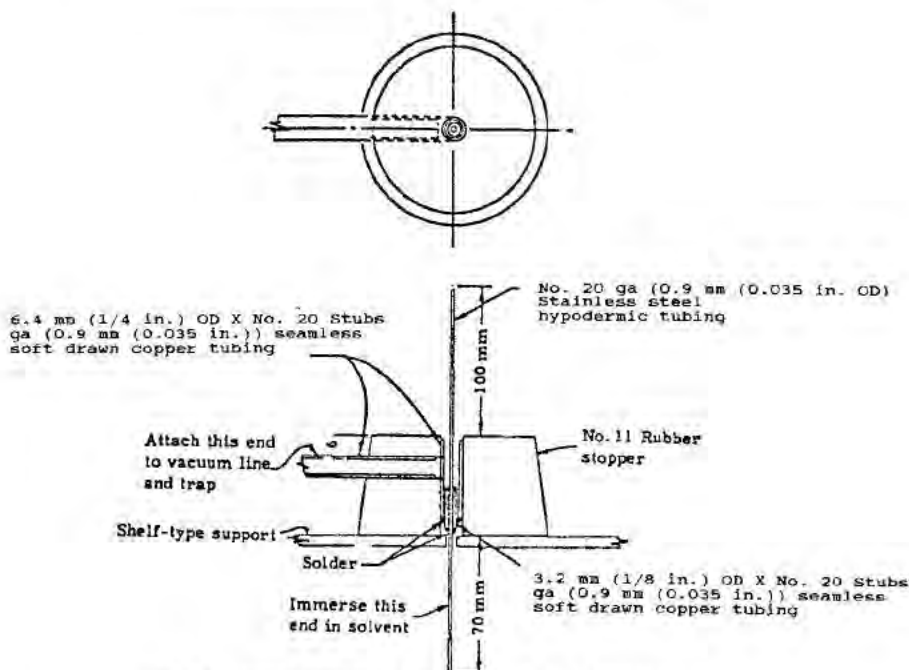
Cleaner Assembly for Bingham-Type Pycnometer
